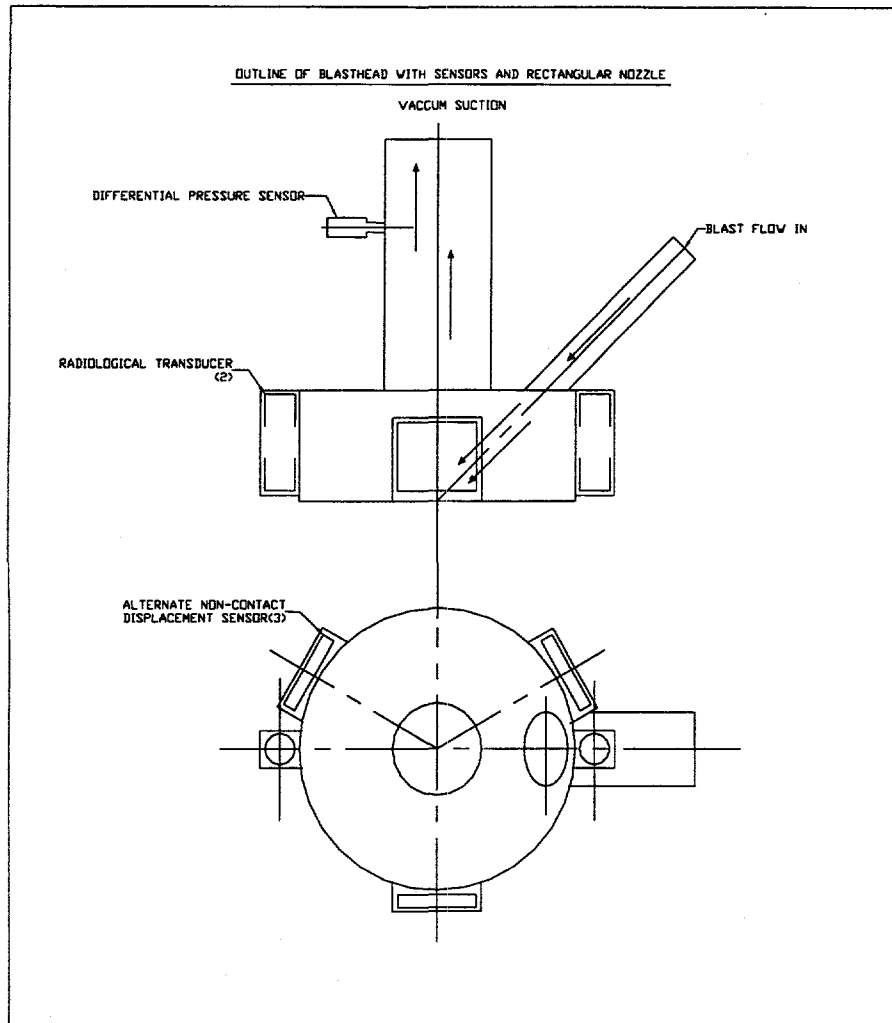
Possible arrangement of sensor component with compact blasthead chamber design.
